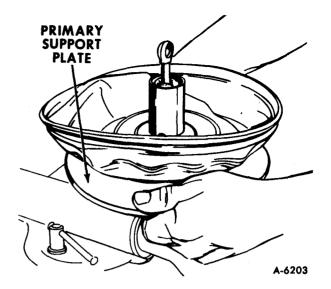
Locking or Unlocking Primary Support Plate from Primary Power Piston
